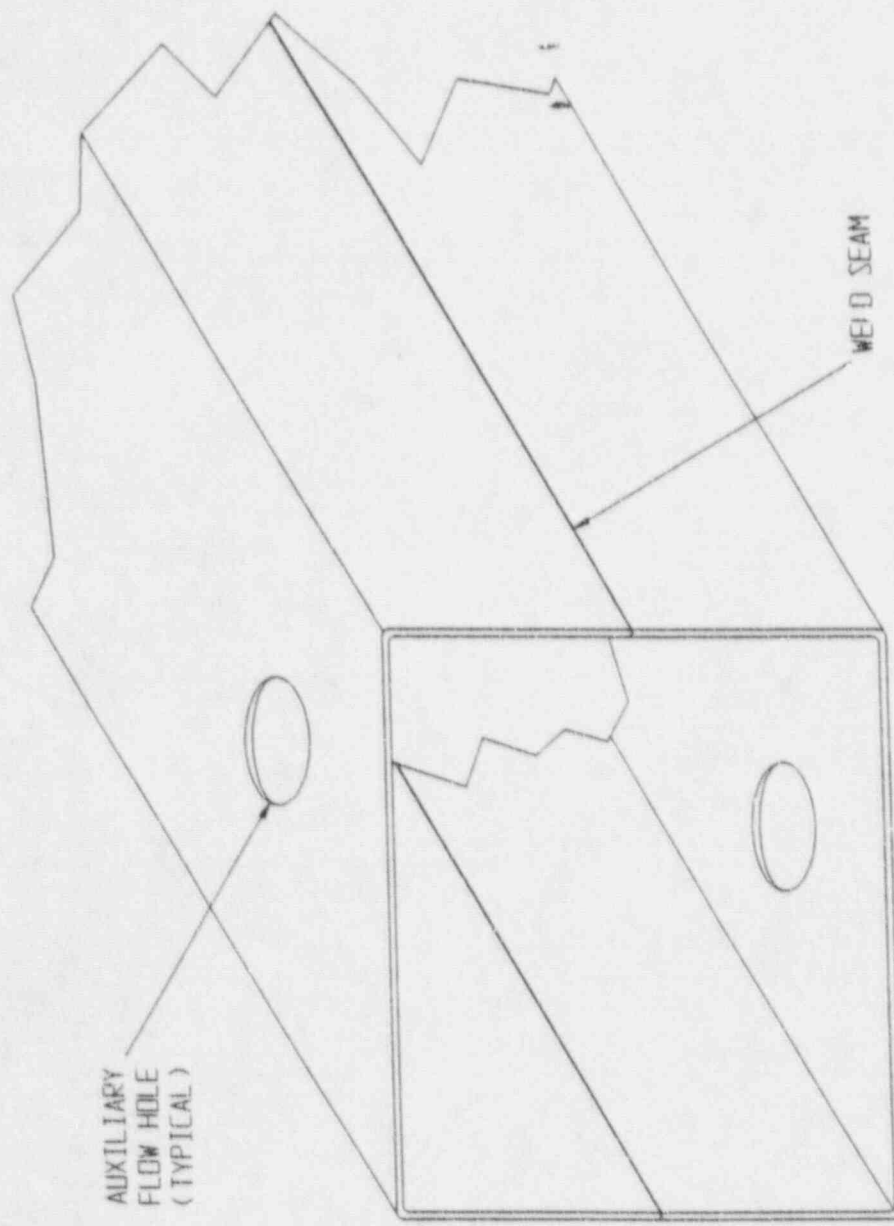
SEAM WELDED PRECISION FORMED CHANNELS
